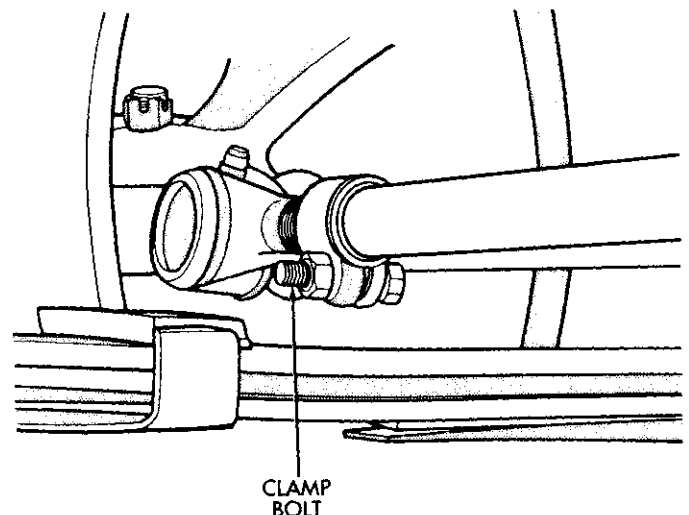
Tie Rod/Drag Link Clamp Bolt
